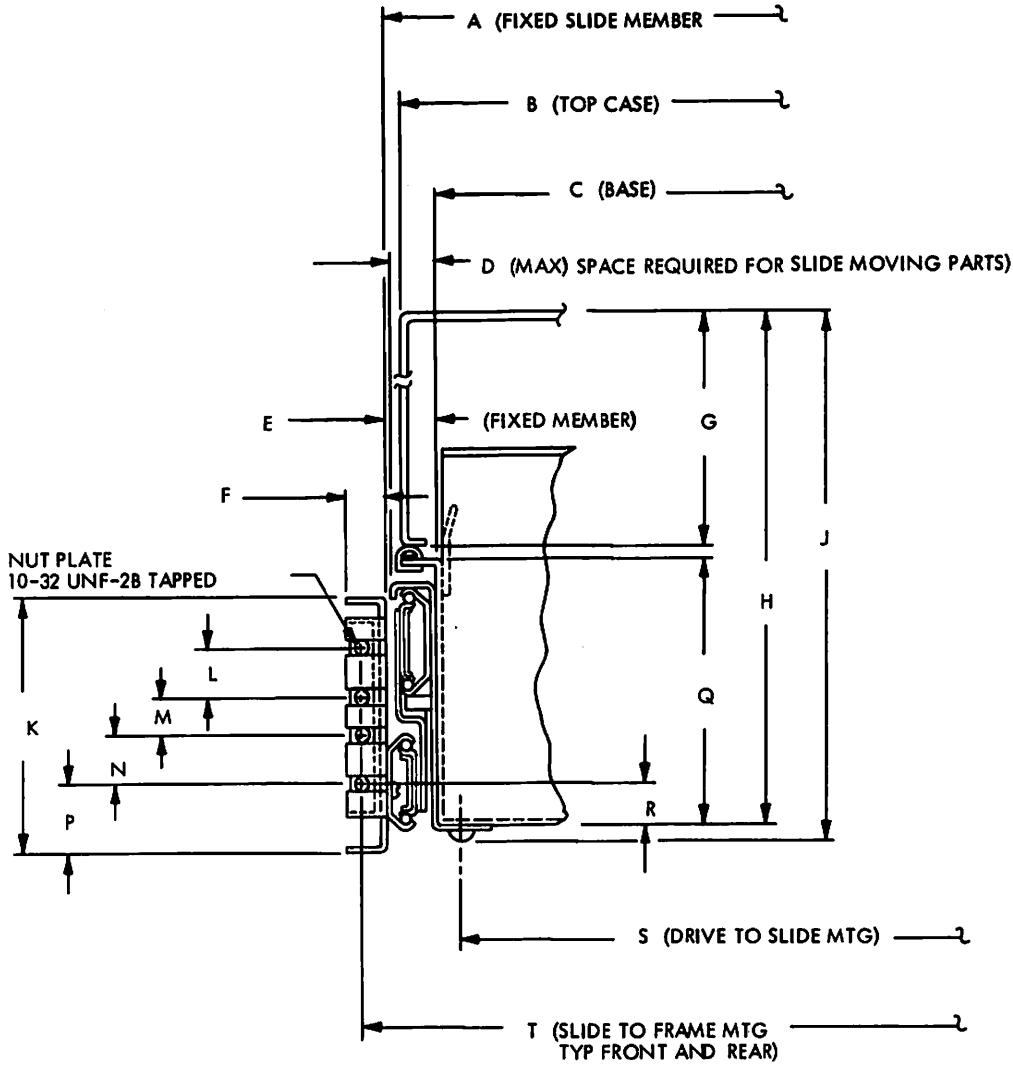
Rack Mounting Details (with or without slides) (Sheet 1 of 2)
